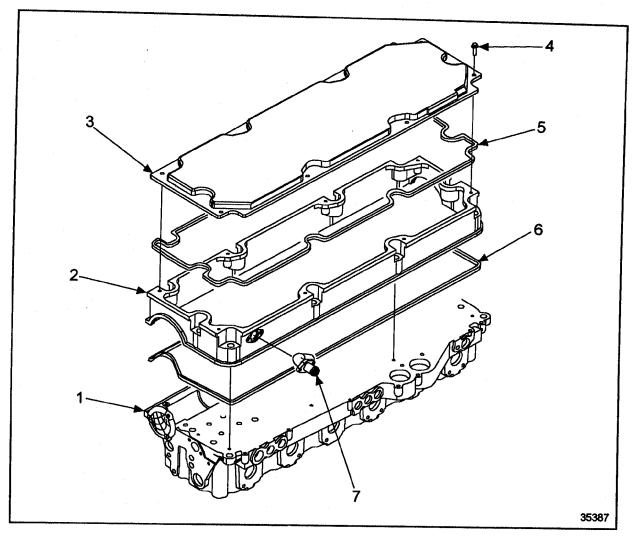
One-piece Rocker Cover - Series 60 Diesel Engine
